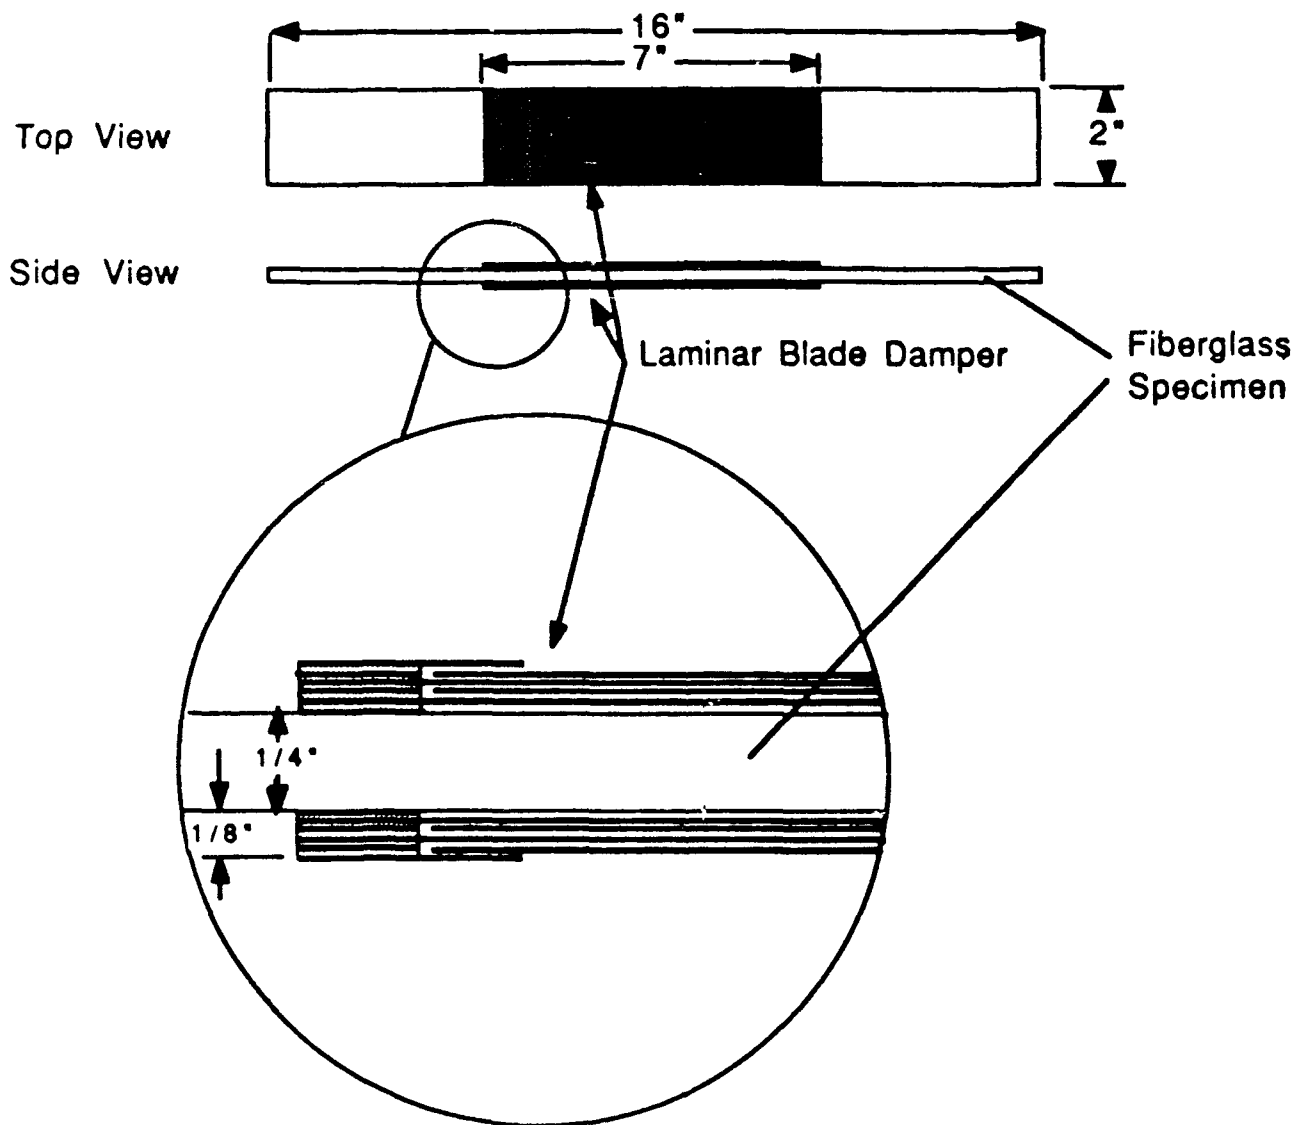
Second Prototype Laminar Blade Damper Mounted on Fiberglass Sample
